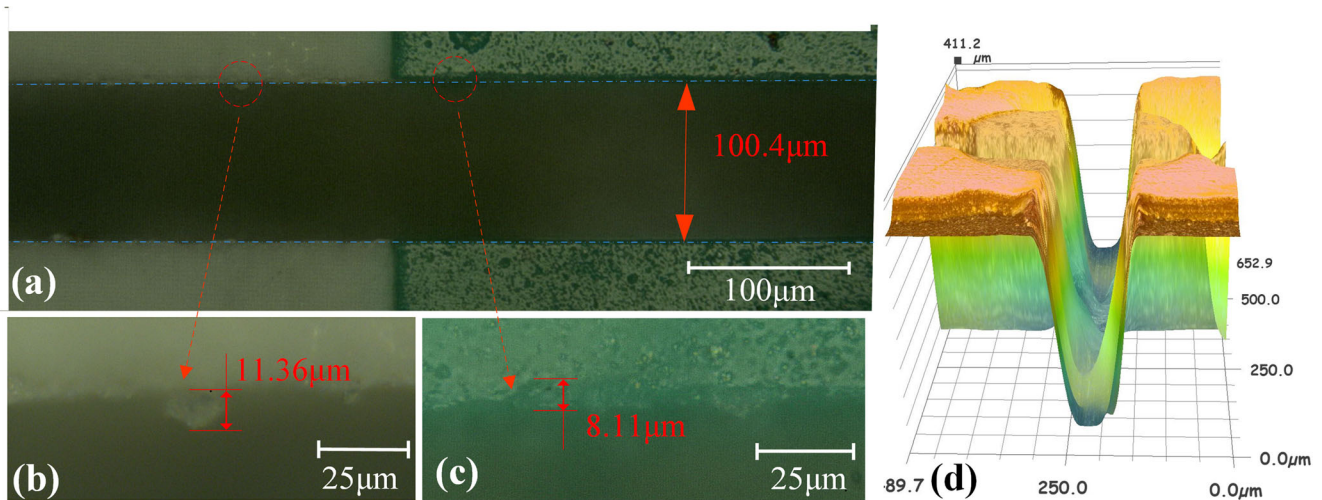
a The width of the dicing groove with a burr (b) and a breakage (c) and 3D sectional view (d)
